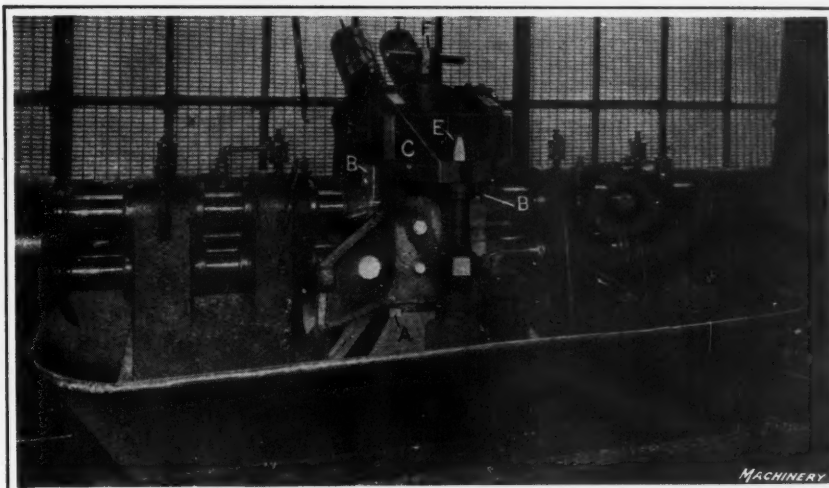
Special Quadruple Opposed-spindle Machine for boring the Main Shaft and Countershaft Bearings in Essex Transmission Cases
